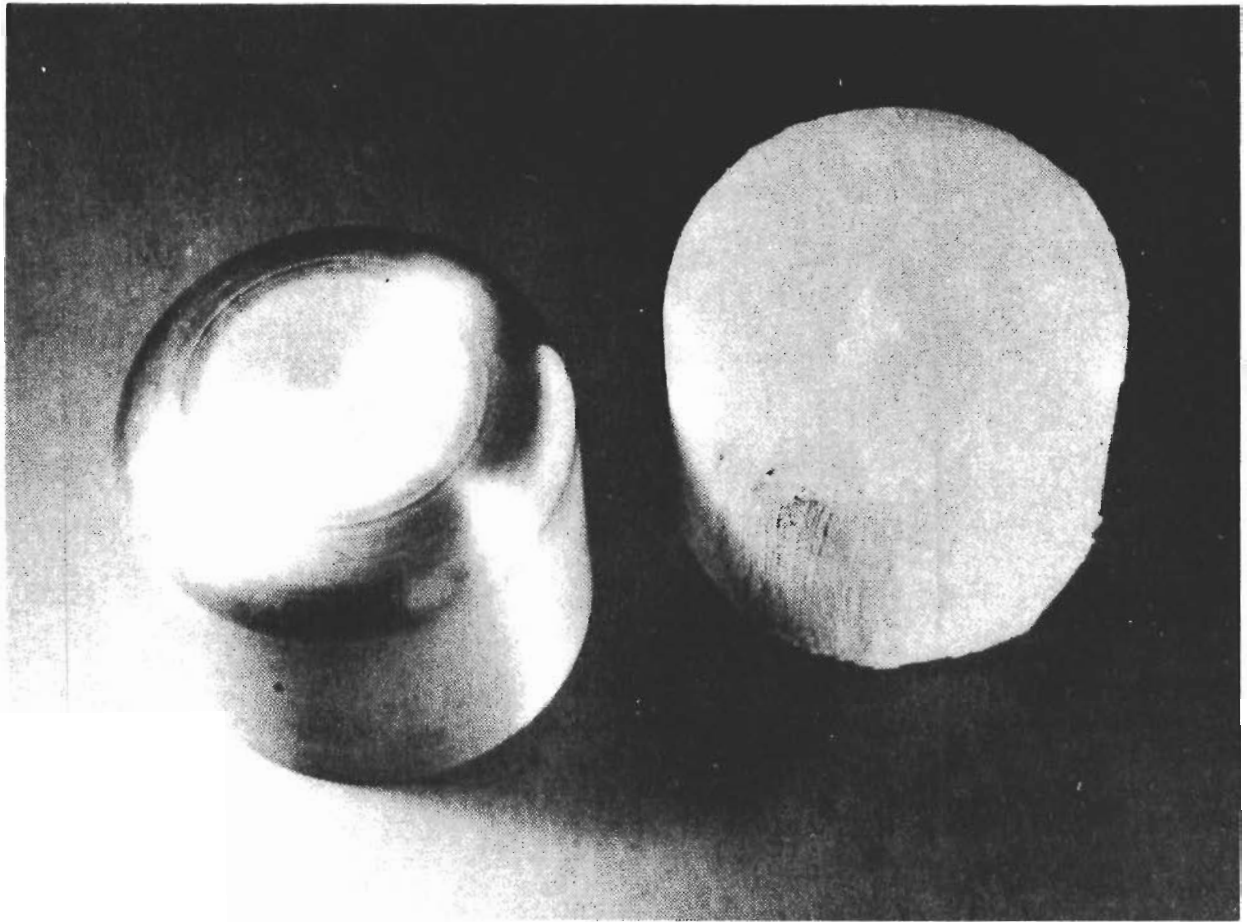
Photograph, 1/3X, of an uncoated Beryllium billet next to one which has been coated with NMI-C glass. The coated billet is ready for insertion into furnace and subsequent extrusion.
